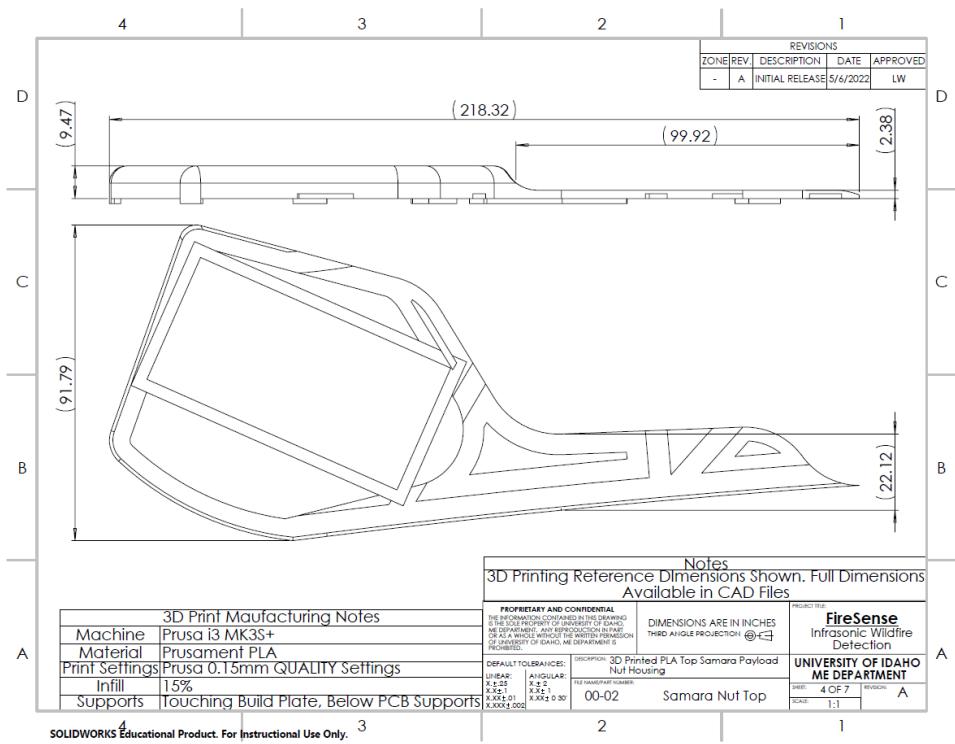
Technical Drawing Package Sheet 4, Samara Nut Top
